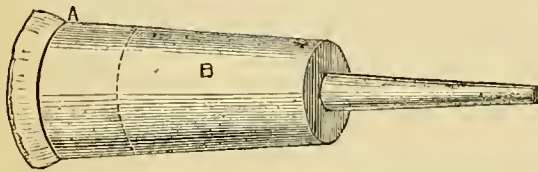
CHINESE LUBRICATOR FOR TOOLS.
